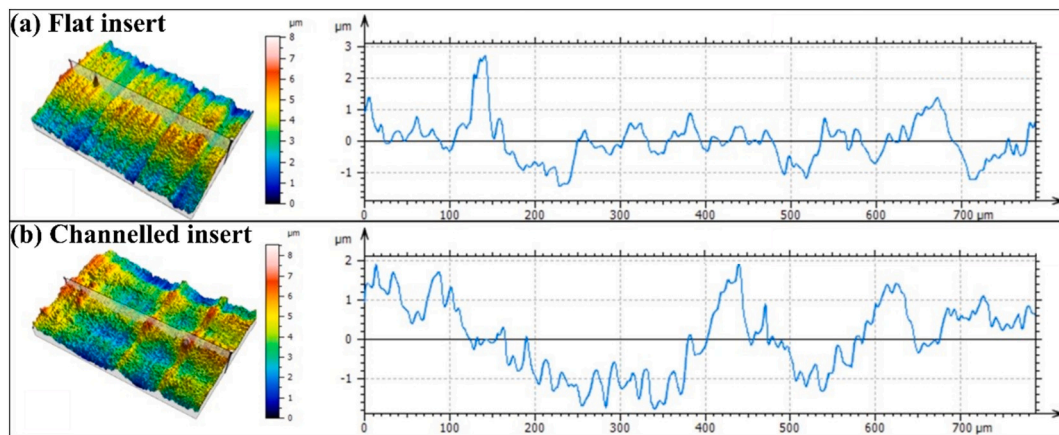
Surface morphology of the machined workpieces following machining under coolant conditions. (a) Surface produced with the flat insert, where a cross sectional analysis yields a roughness between $-1 \mu\text{m}$ and $1 \mu\text{m}$. (b) Surface produced with the channelled insert, where a slightly larger roughness is depicted (variation between $-2 \mu\text{m}$ and $2 \mu\text{m}$).
